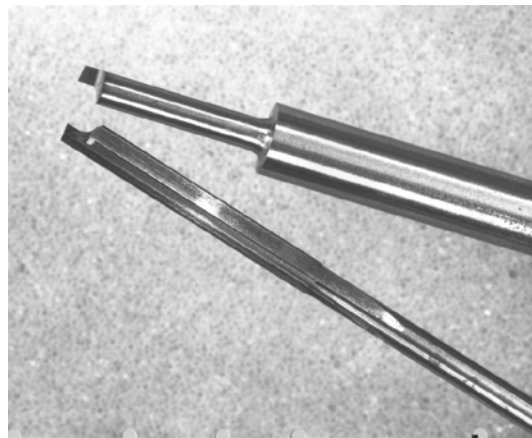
Example of Tools Used to Remove Chips from Bottom of Threaded Blind Holes
